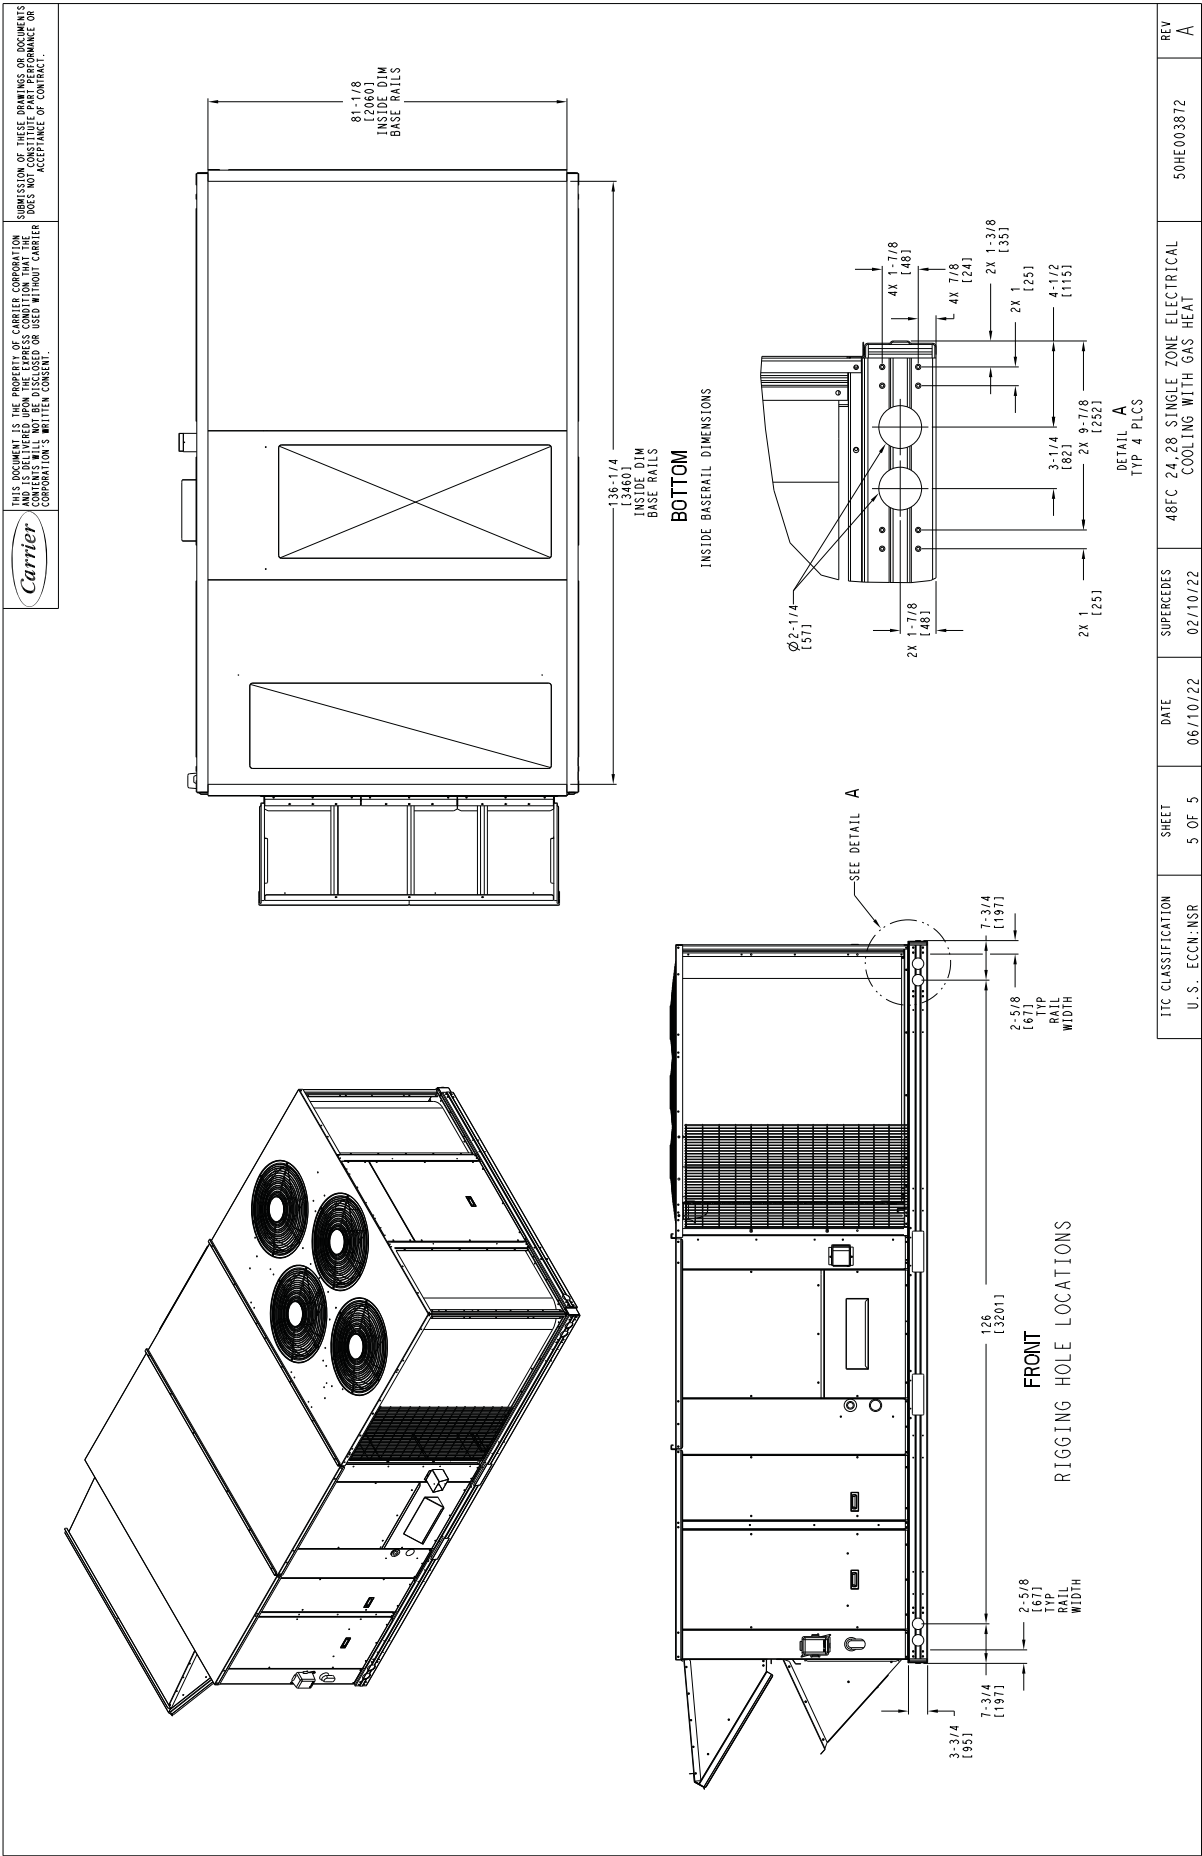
48FC24-28 Base Unit Dimensions (cont)
